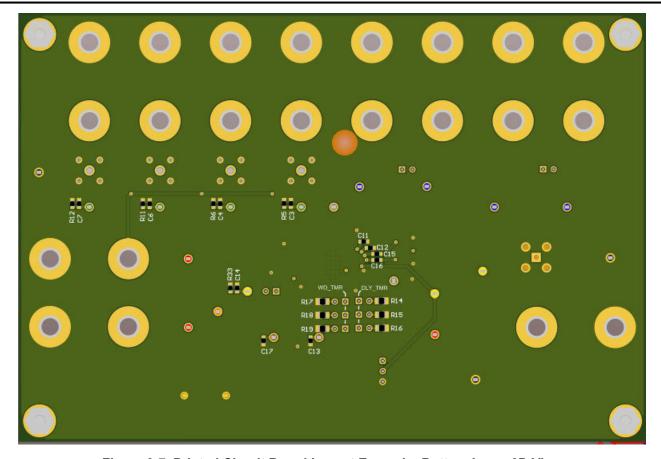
Printed Circuit Board Layout Example: Bottom Layer 3D View
